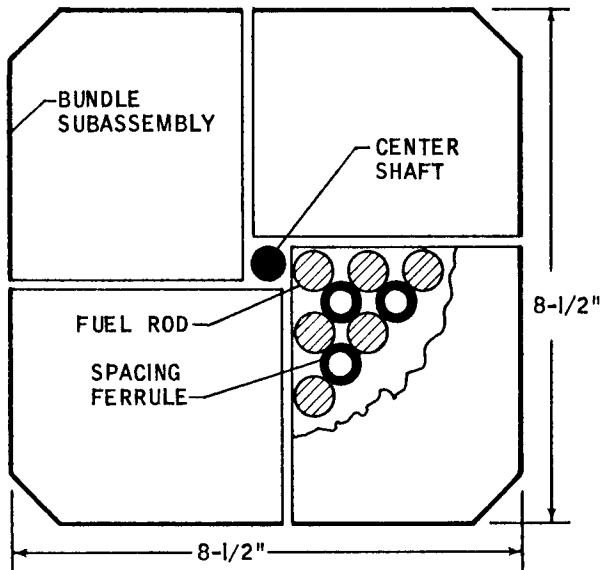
Bundling Assembly for Savannah Fuel Elements
